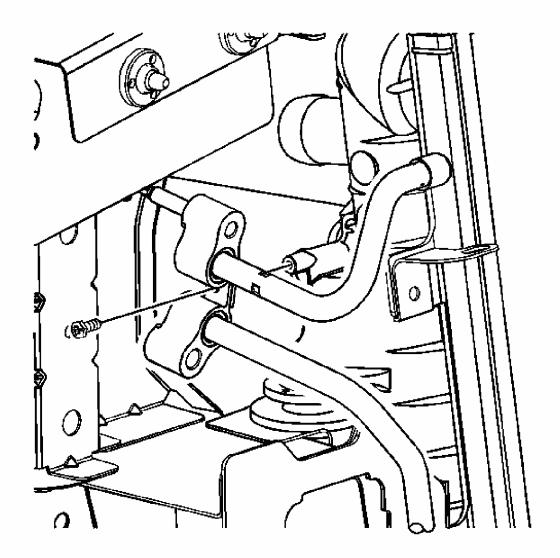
Removing/Installing Condenser Lines Courtesy of GENERAL MOTORS CORP.
